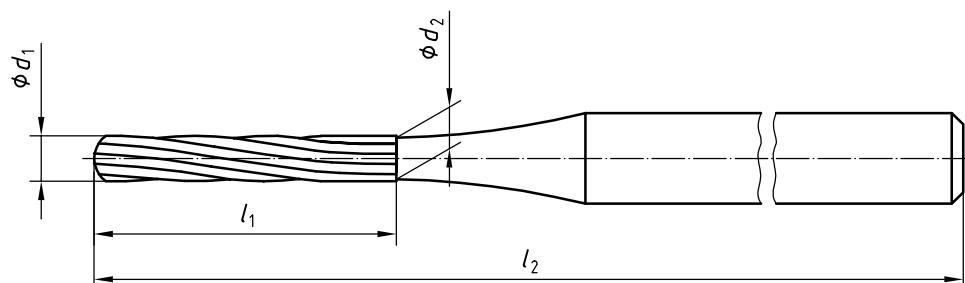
Cylindrical, rounded edge, head length 8 mm, carbide finishing burs
